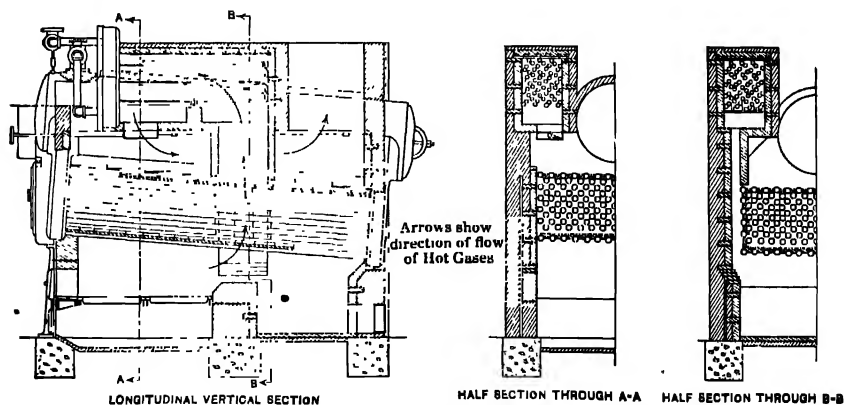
"Heine" Superheater Installed in Heine Boiler.
